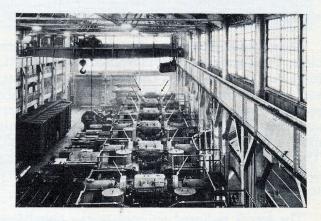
A Steel Mill application of 12 "Stearns High Duty" Magnetic Clutches mounted on 32" Cold Strip Screw Down Rolls
